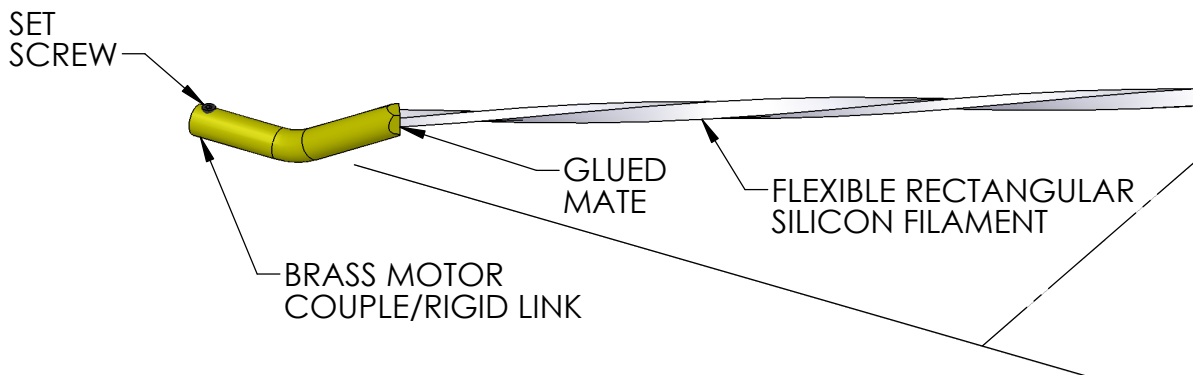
Flexible, rectangular cross-section tail assembly (Flex Tail: Rec)
